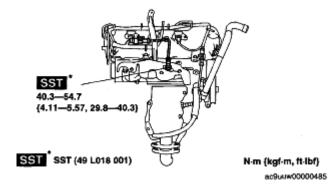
View Of RH HO2S With Torque Specifications Courtesy of MAZDA MOTORS CORP.
